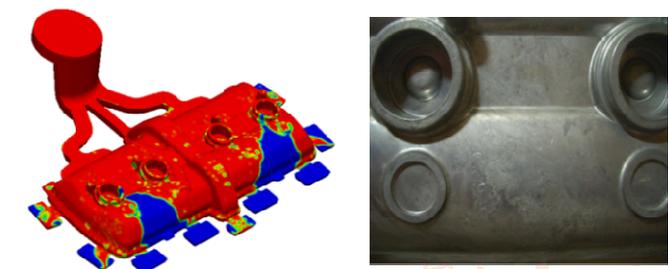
Cast-Designer CFD simulation shown the gas bubbles and the risk of gas entrapment, also the real casting part shown the surface defects existed on the same region.
